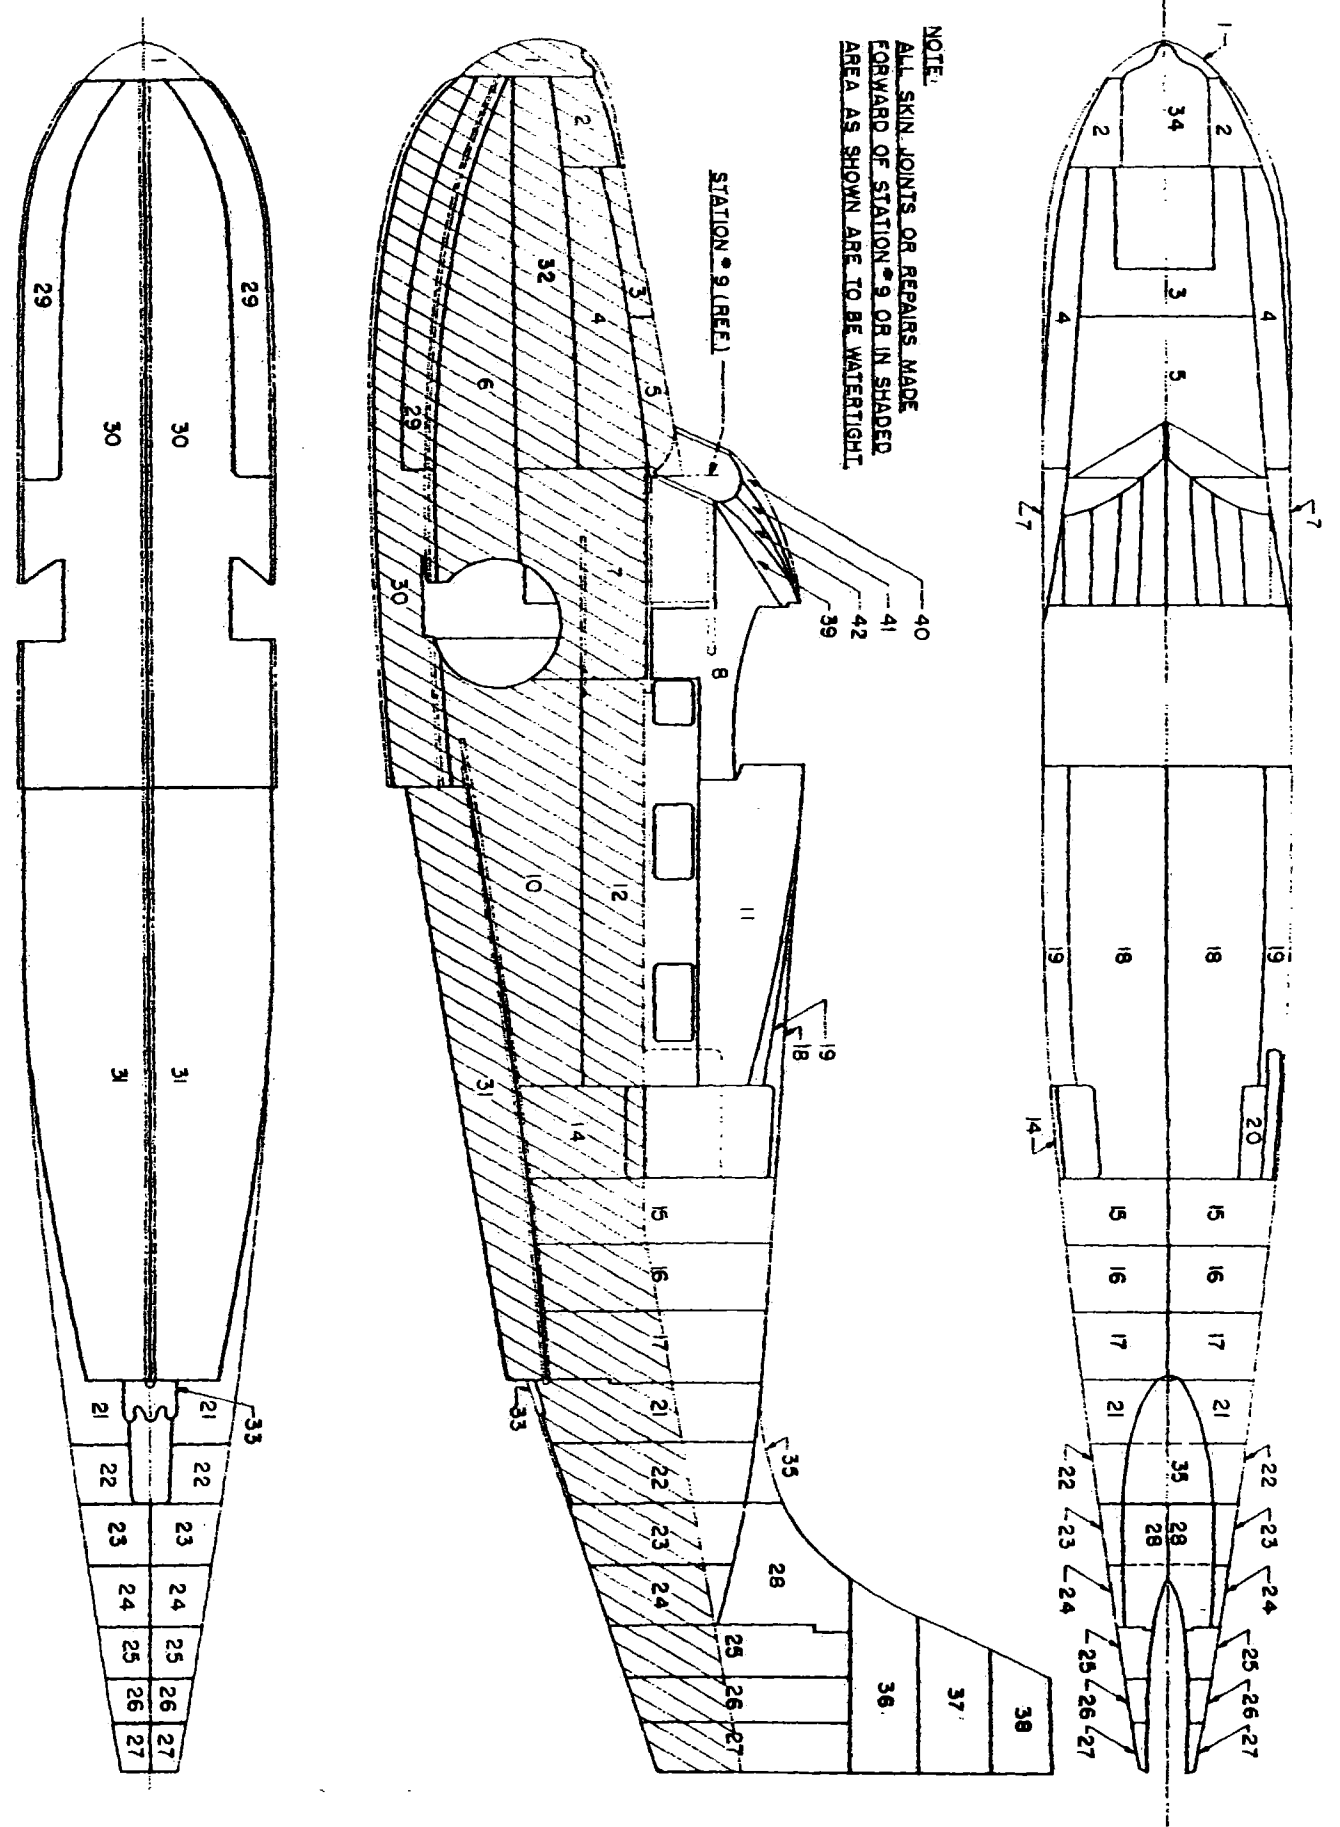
Hull Skin Plating Diagram (Sheet 1)
